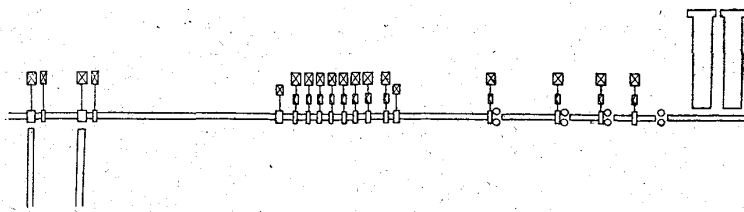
Layout of a hot strip mill at Kuré works (Nisshin Steel Works Co., Ltd.)
